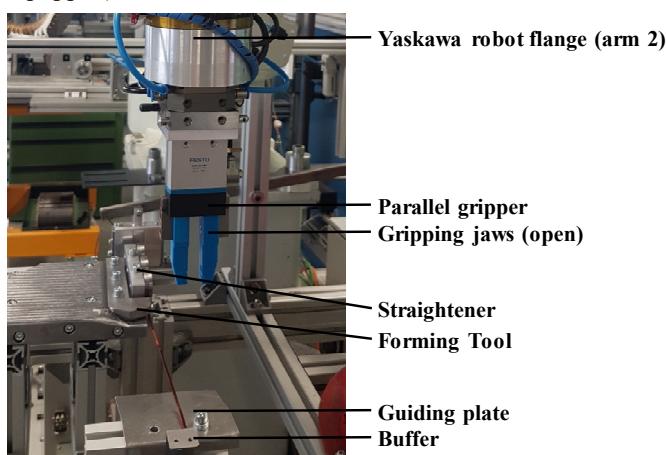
Zero position of the robot manipulator R2 with opened two-finger parallel gripper
